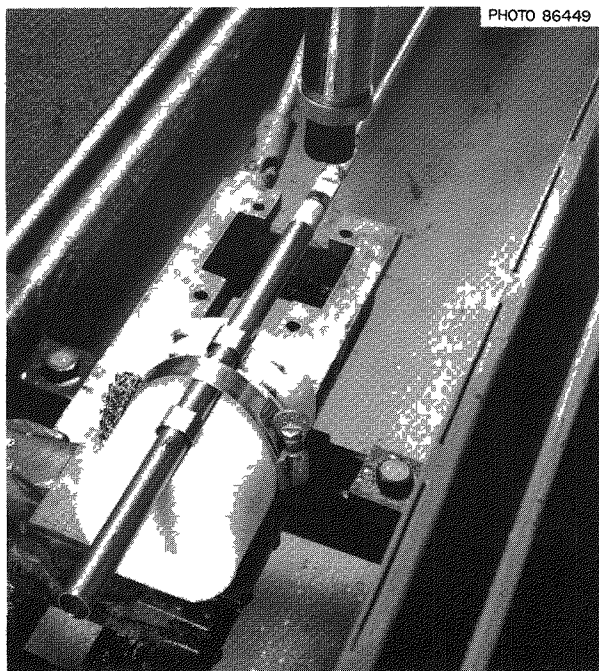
Preliminary Scanner System Showing the Ultrasonic Probe Transducer Entering the Bore of a Tube-to-Spacer Mockup Assembly.
